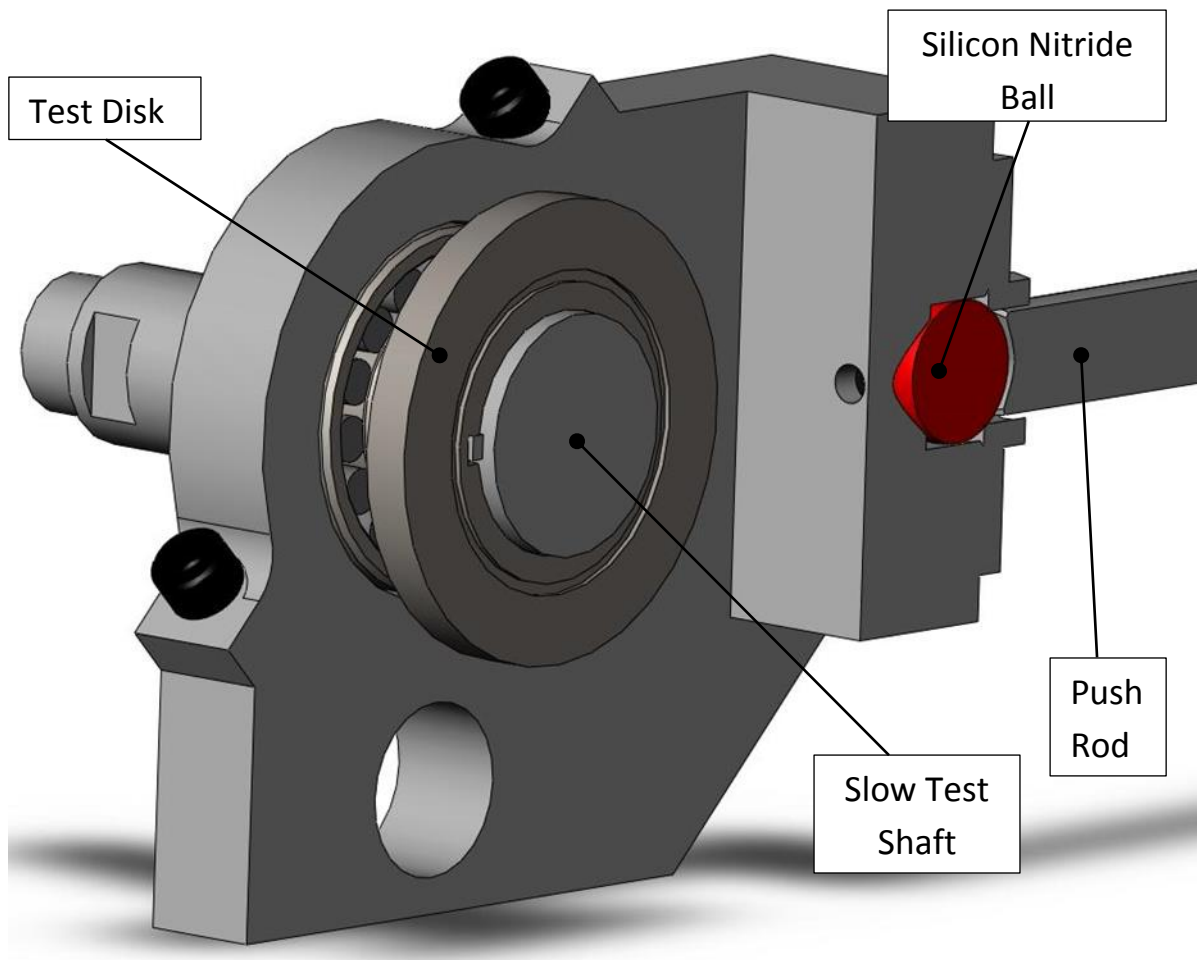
3D CAD model showing a section view of the push-rod and yoke mechanism
